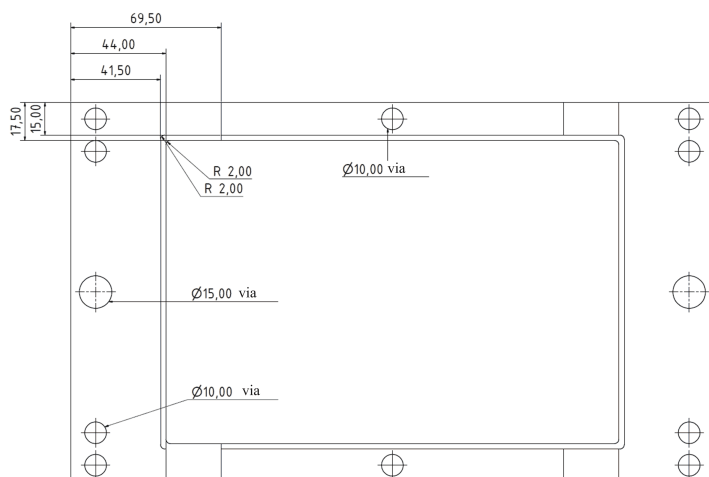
Dimensions of the top side of the manifolding frame: Top view of the manifolding frame. All dimensions are in mm. Modified from (Todt 2011).
